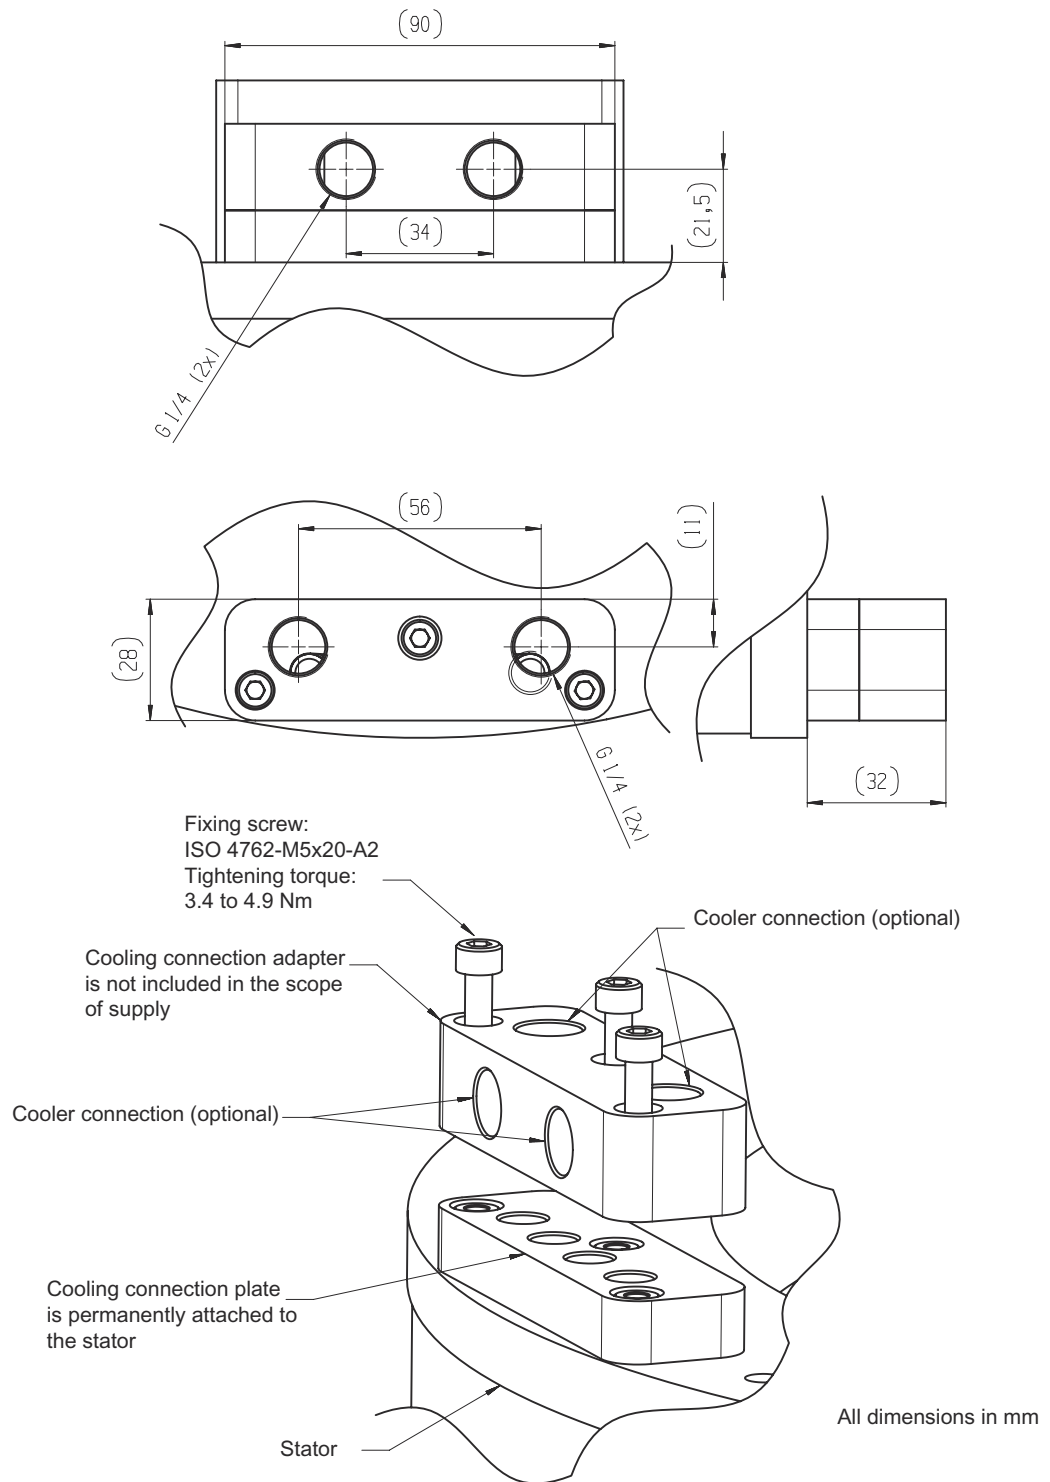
Mounting the cooling connection adapter 1FW6160, 1FW619x, 1FW6230
